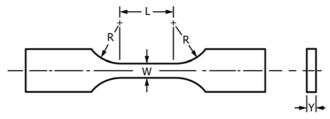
Specimens With Tangentially Blending Fillets Between the Uniform Test Section and the Ends
